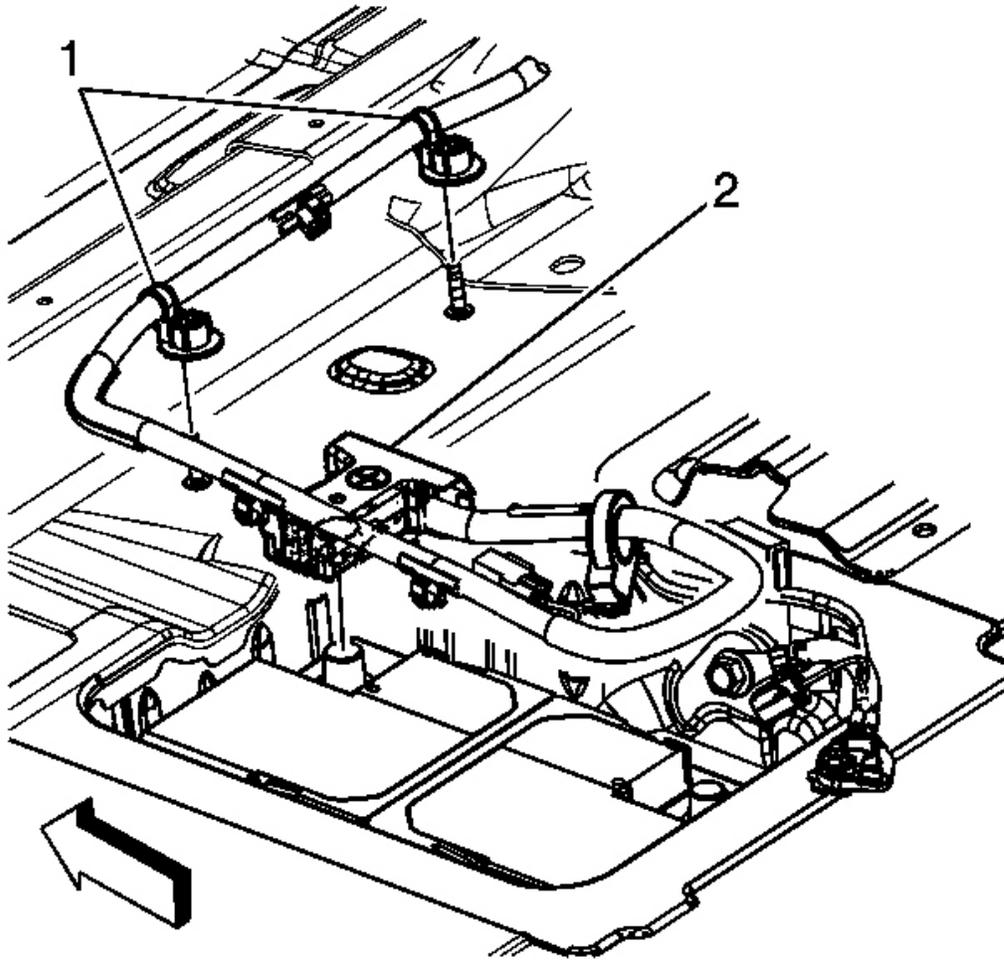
Identifying Body Wiring Harness, Electrical Connector & Positive Battery Cable Clips
